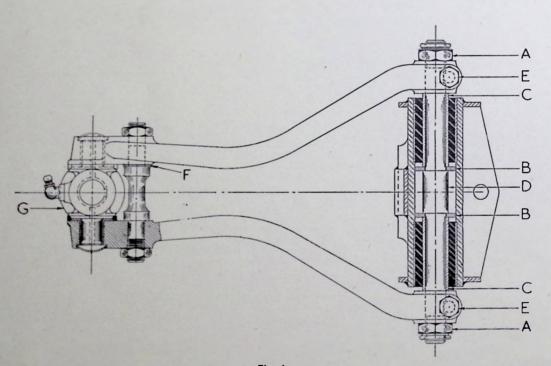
Fig. I. Section through Top Suspension Arm Bearing Bush Assemblies.
